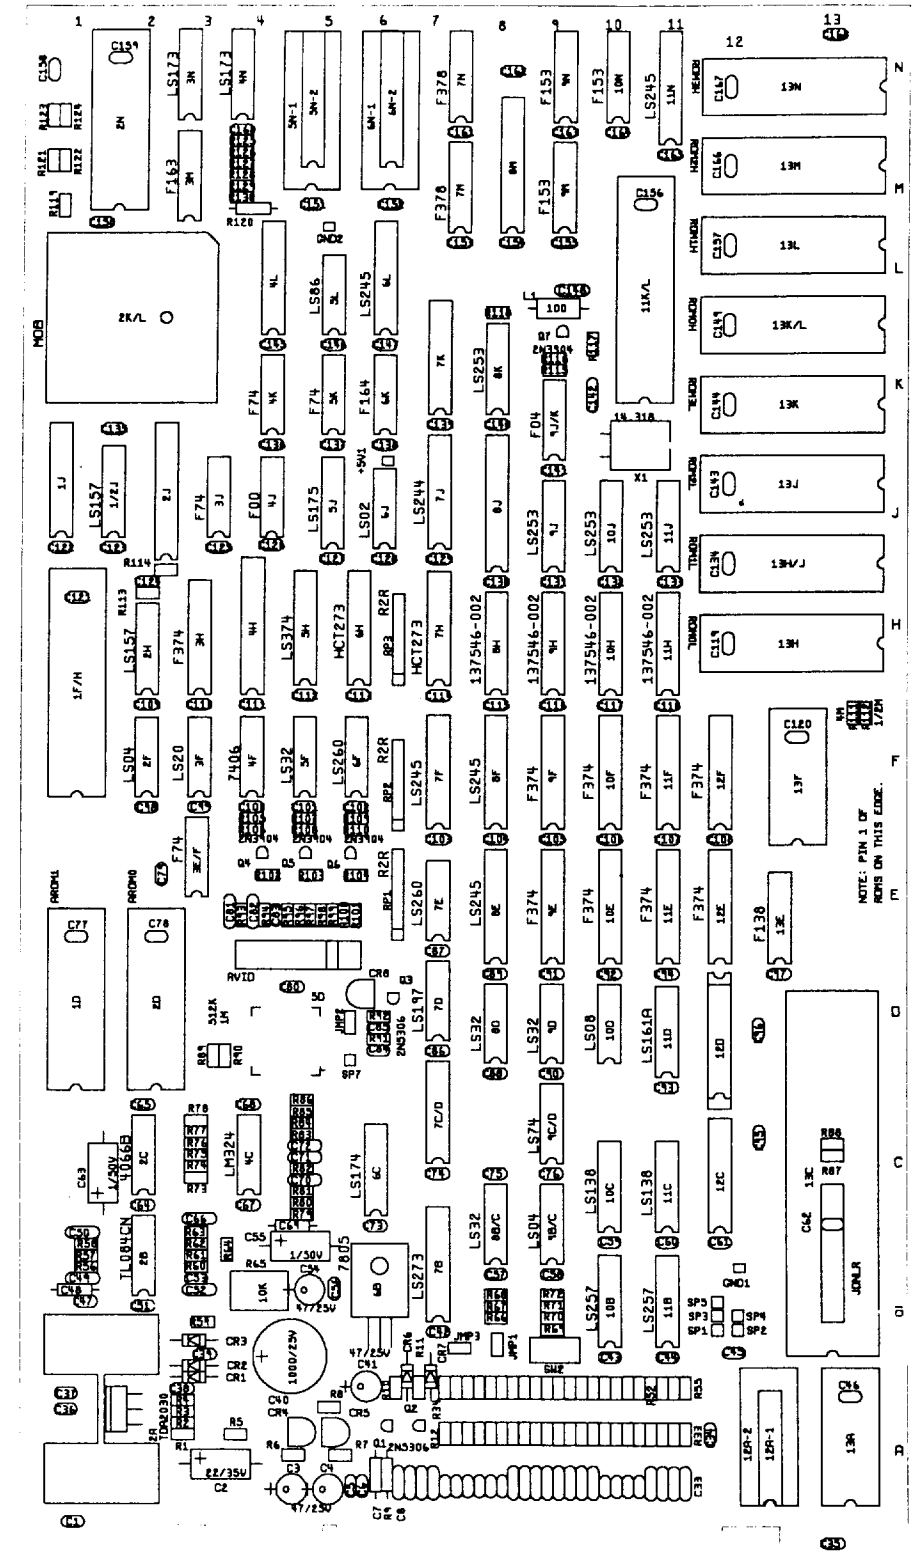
Rampart Game PCB Assembly (3-Player Version)
